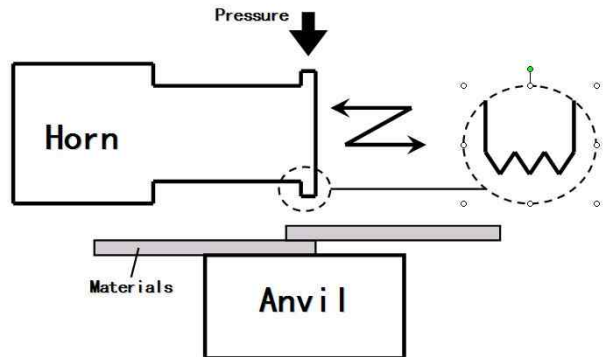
Basic principle of ultrasonic metal welding
